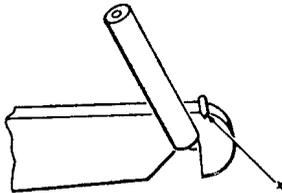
Termination of Wire on Terminal of Type 65 (or Similar) Terminal Strip
